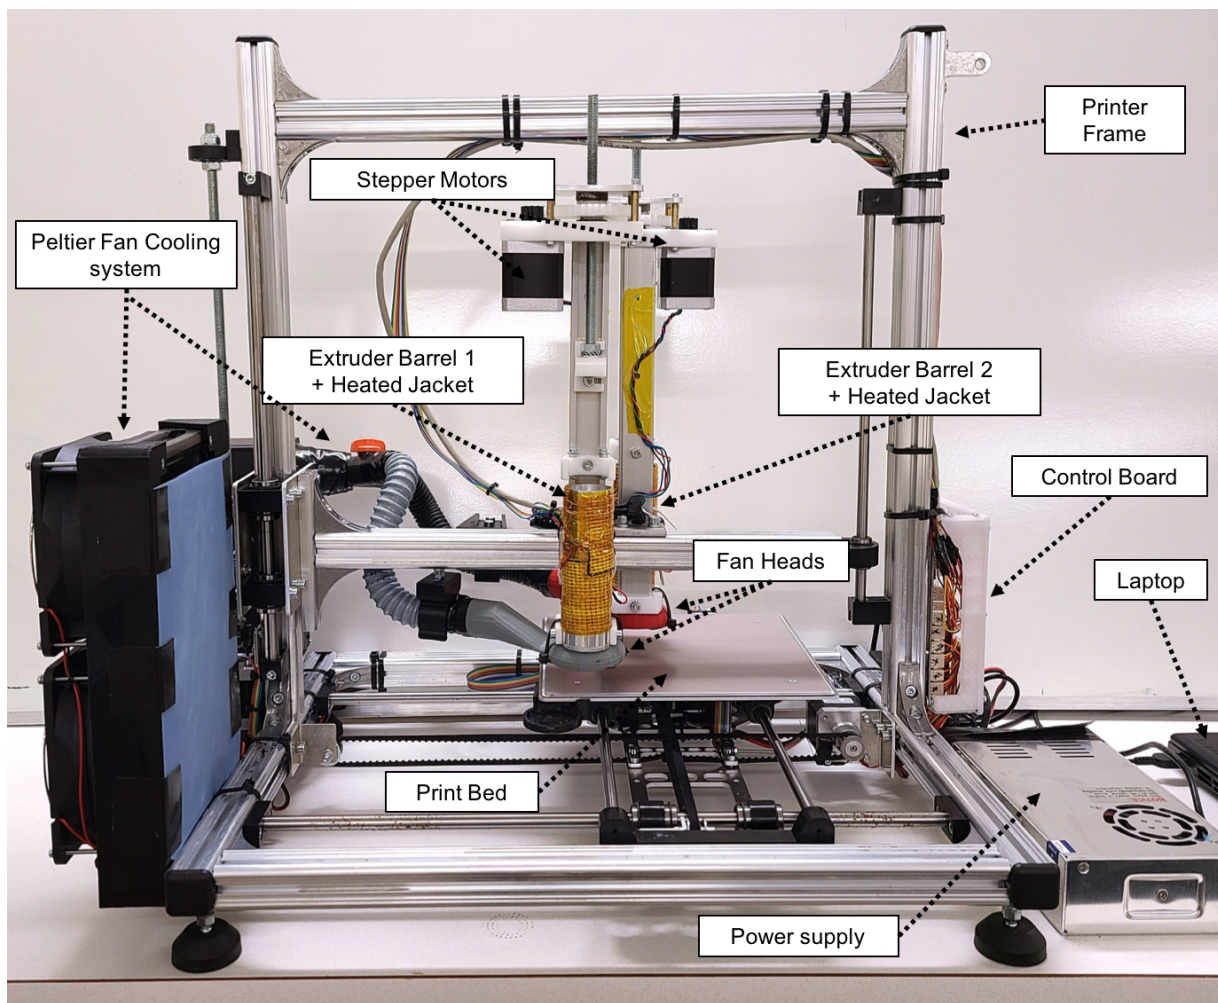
Dual-extruder 3Drag 3D Chocolate printer with labelled parts.
